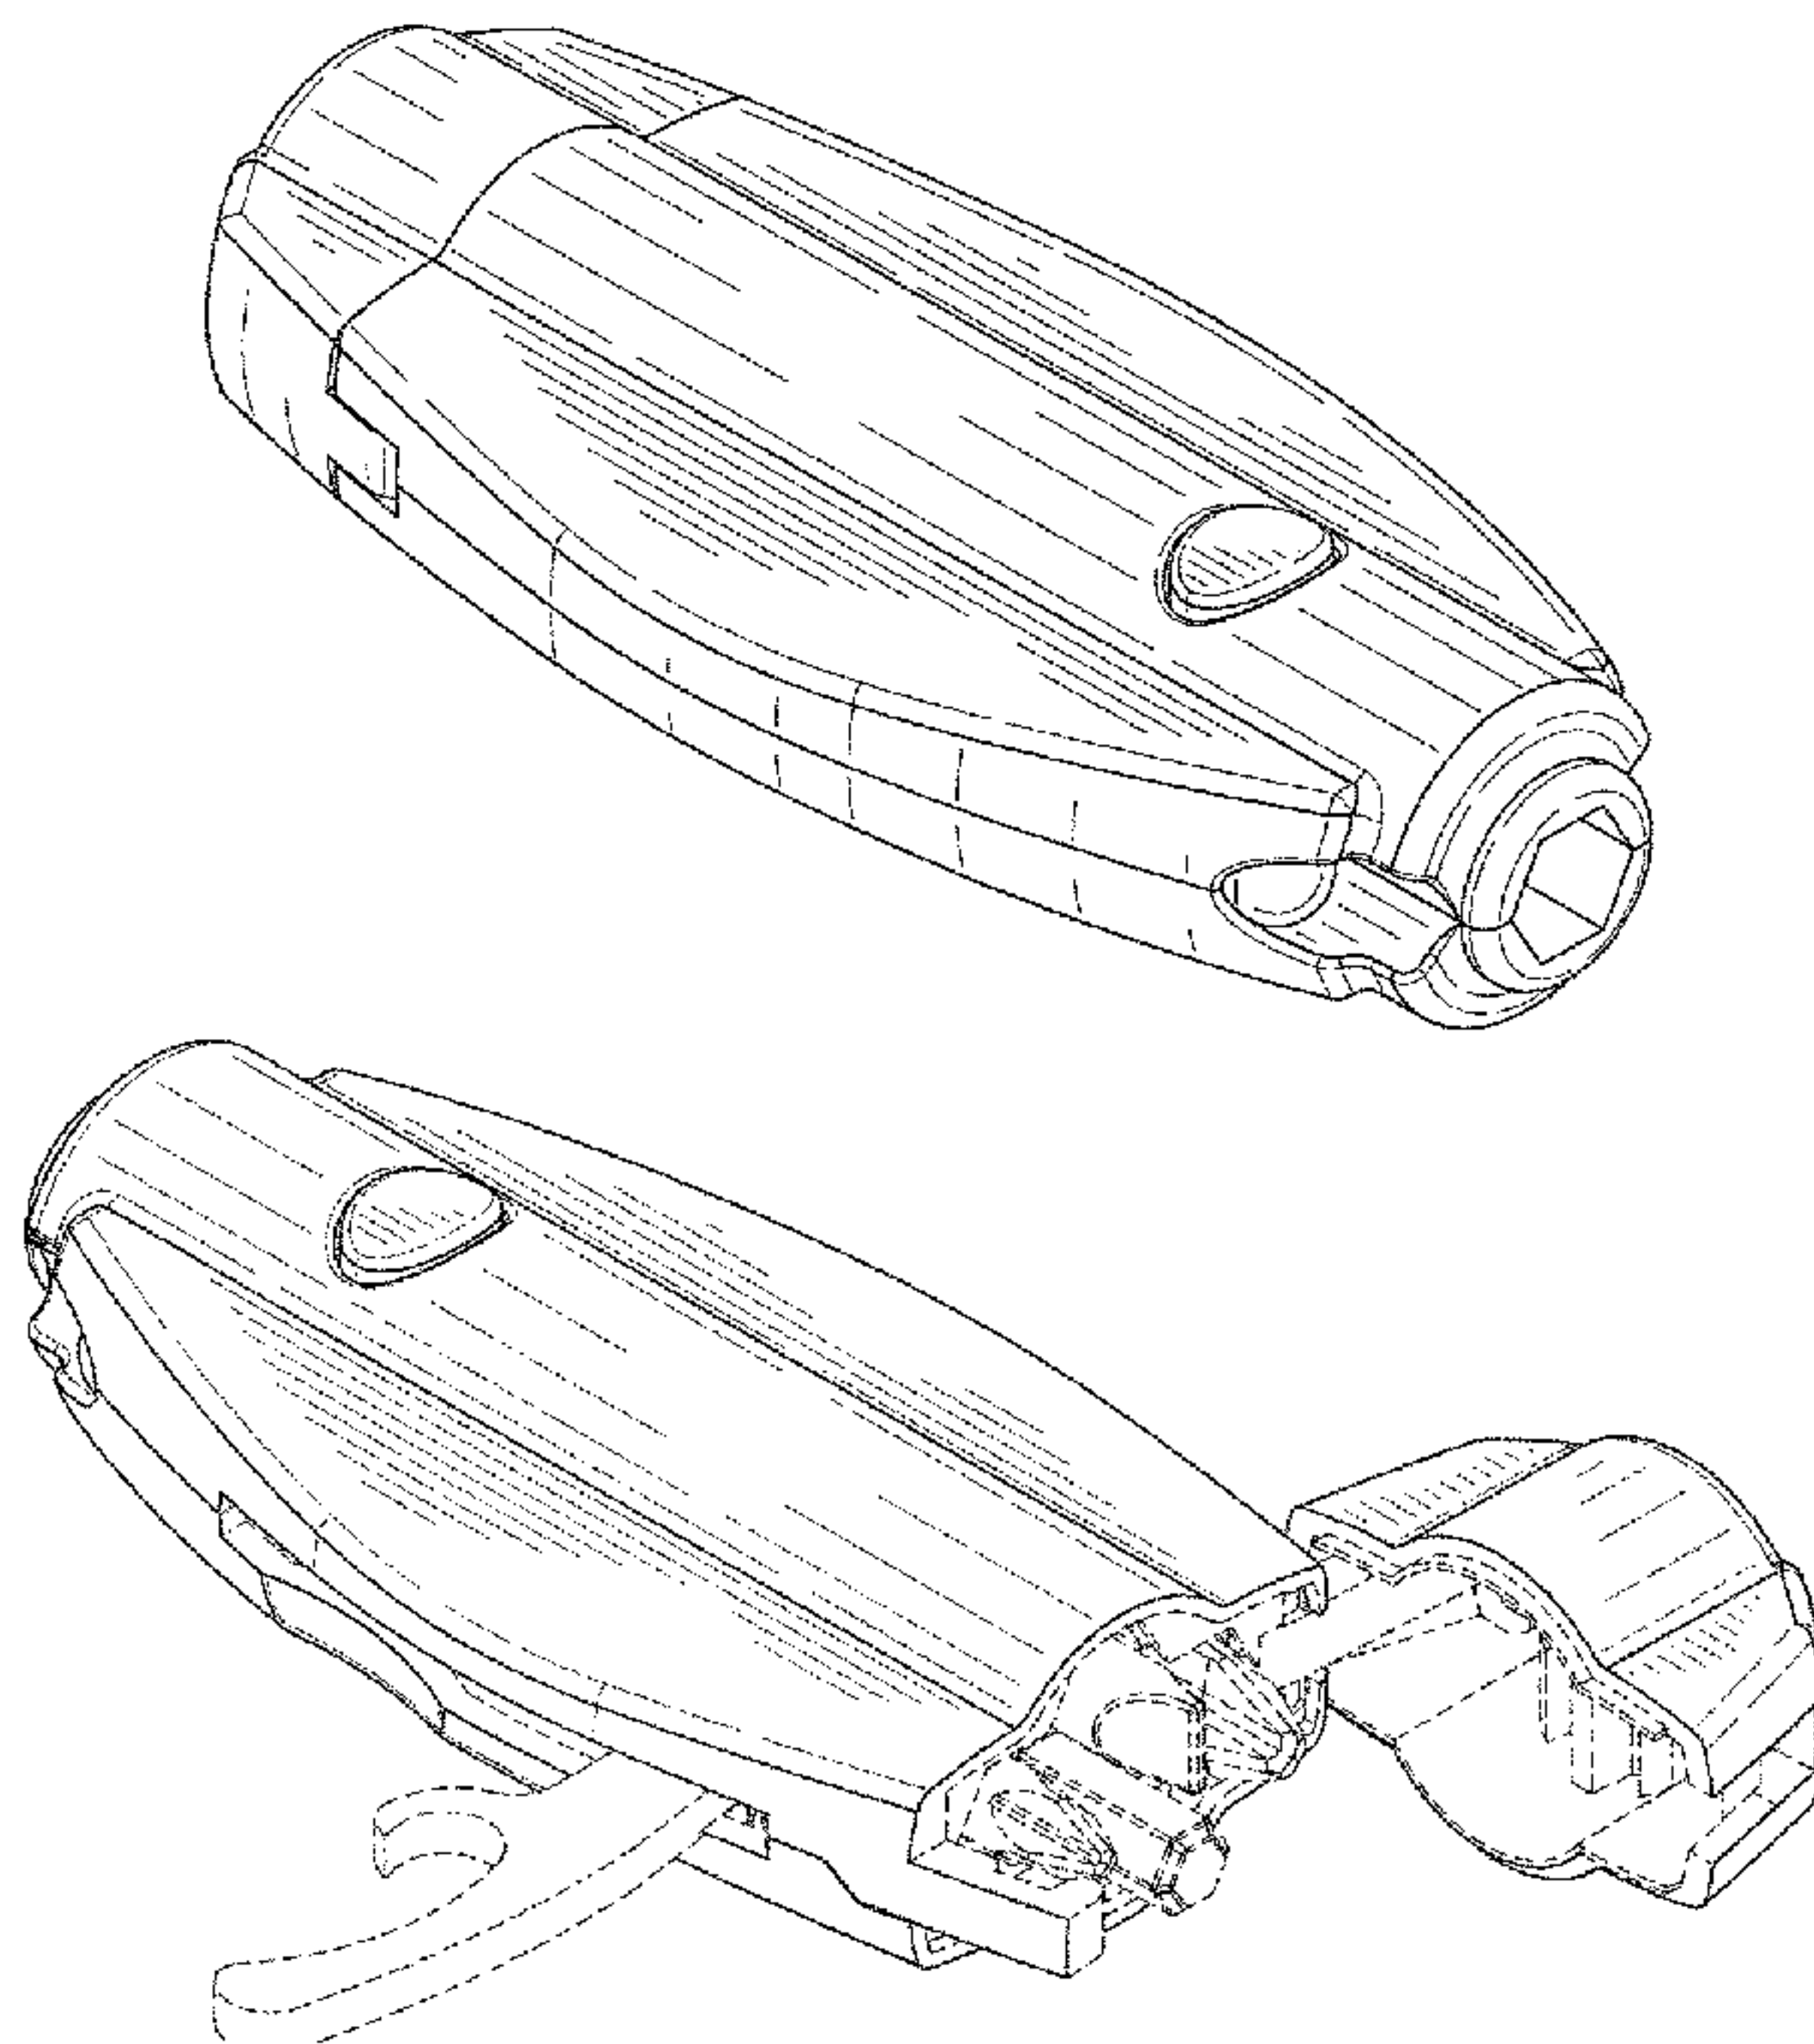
is a perspective top, right side, rear view of the miniature compact driver tool with a component holding cover in a fully open position;
